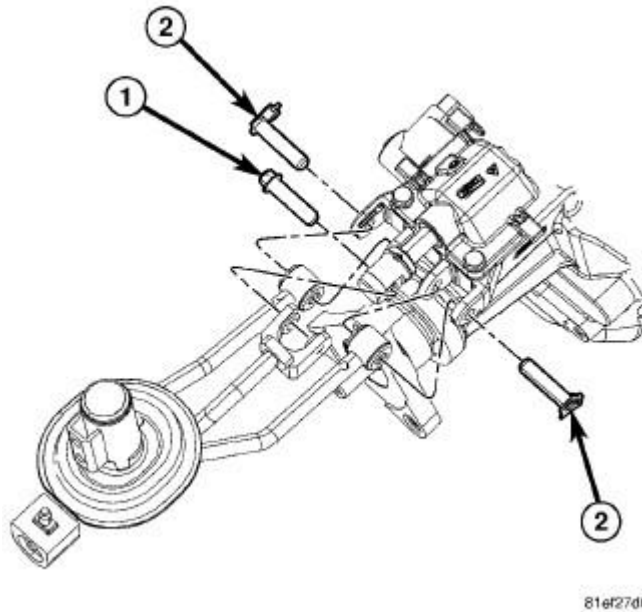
Identifying Shift Linkage Bolt & Roll Pins
